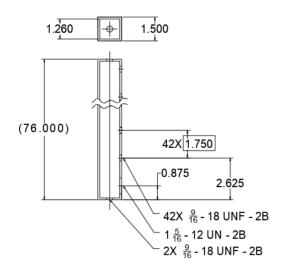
Example of 19" EIA-310-D Rack Manifold Drawing
